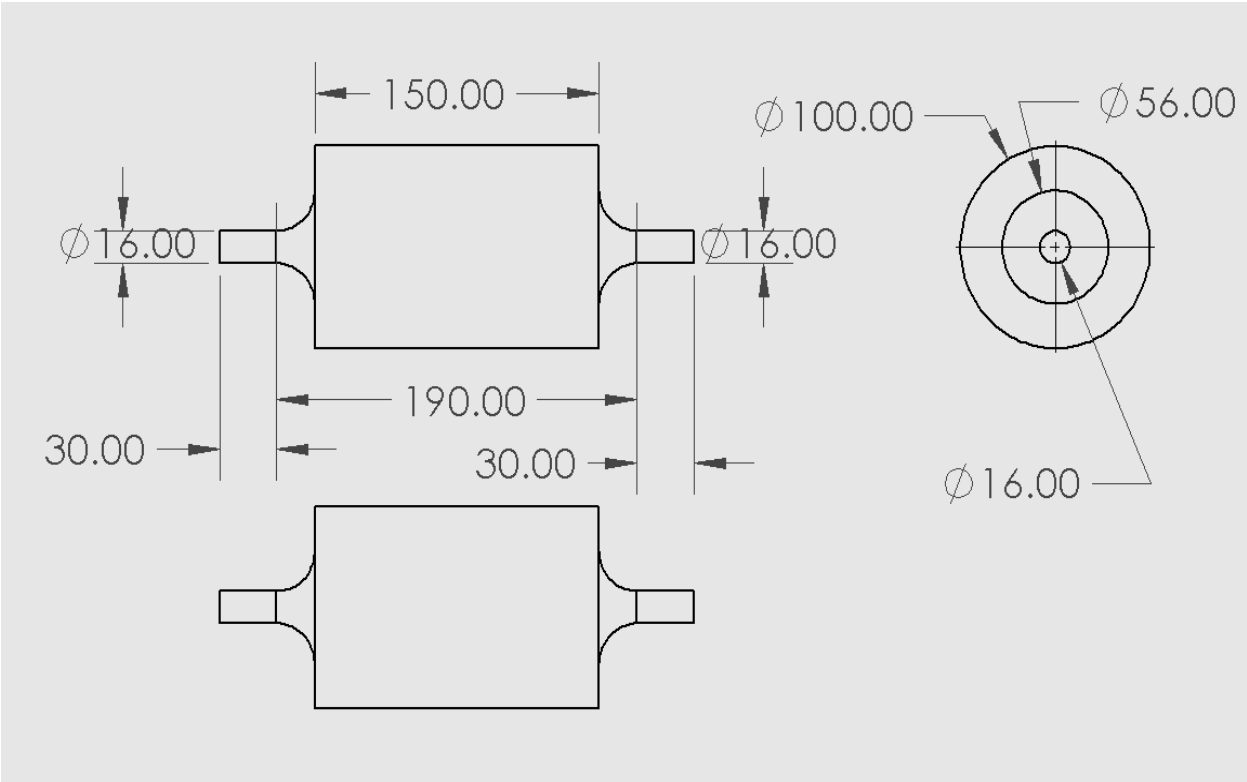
Drawing of drum and shaft as one piece (Scale: 1:1, unit: mm).
